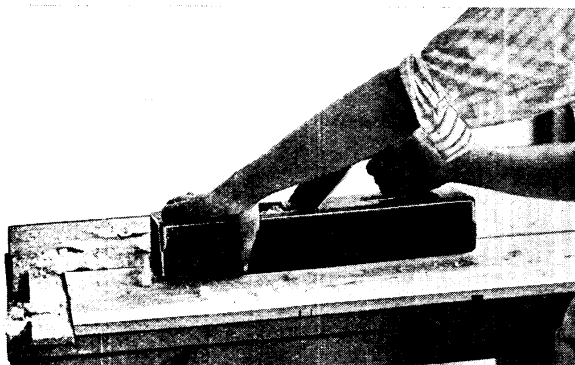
Planing up the outside of the side. Note the method of holding the plane
